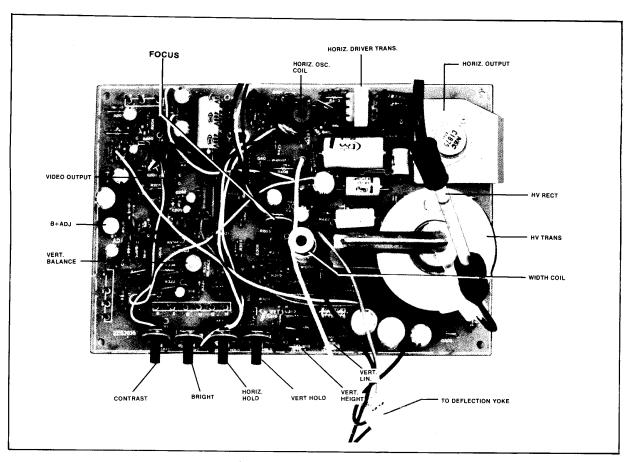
TEC Monitor Printed Circuit Board, Top View
